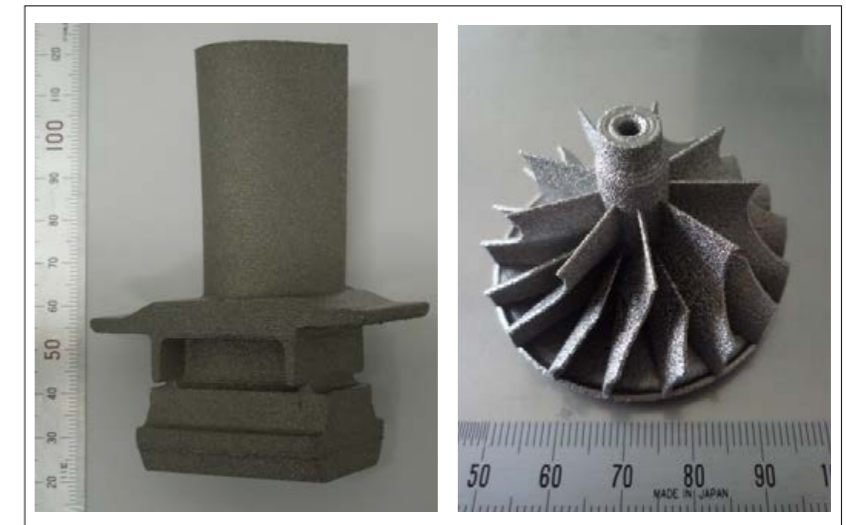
A metal AM turbine blade (left) and impeller (right) manufactured by Metal Technology Co. Ltd (Courtesy of Metal Technology Co. Ltd)
